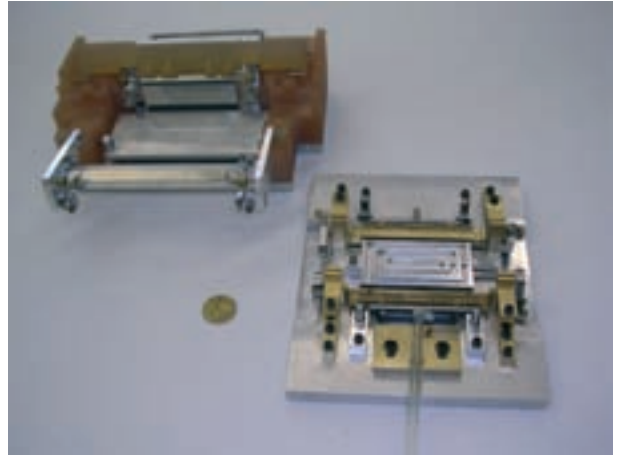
Two prototypes of a production tool for folding and gluing kapton cable to the read-out modules of the ALICE detector.
